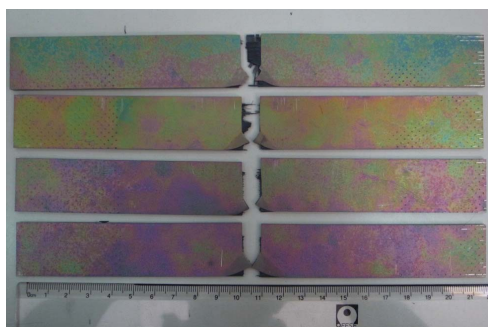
The failure cross-sections of specimens due to middle load fatigue
